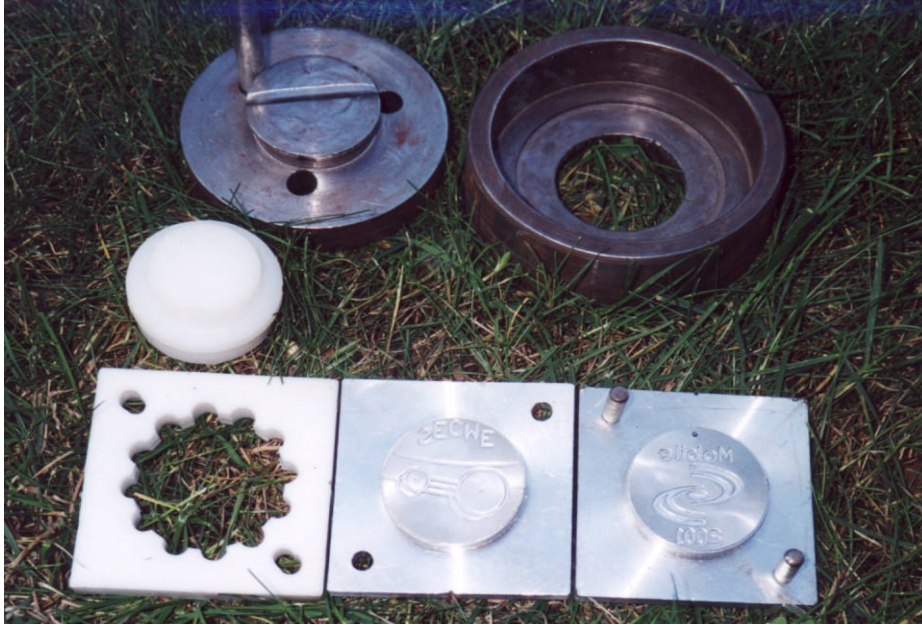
Blanking and stamping die and assembly to produce SECME medallions
